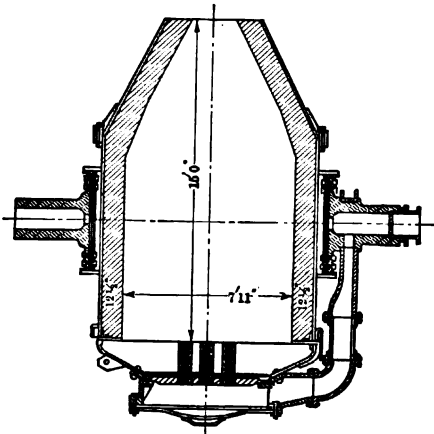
12-15 Ton Bessemer Converter. Concentric Type.
